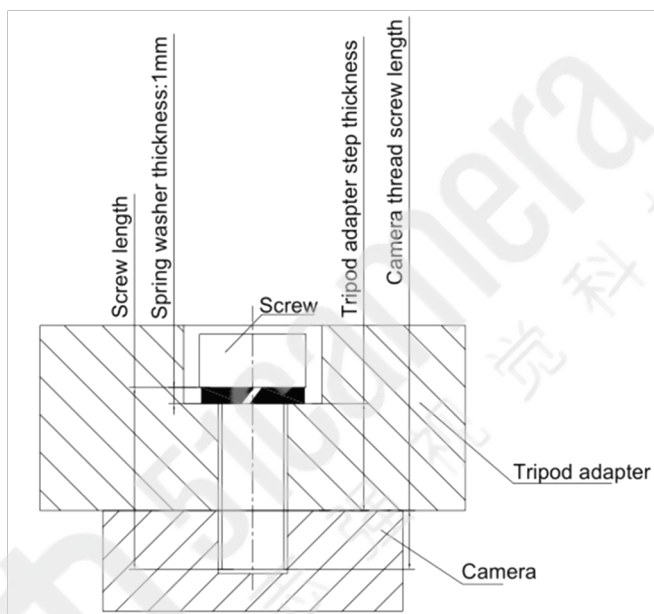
Screw specification, tripod adapter step thickness and spring washer thickness
